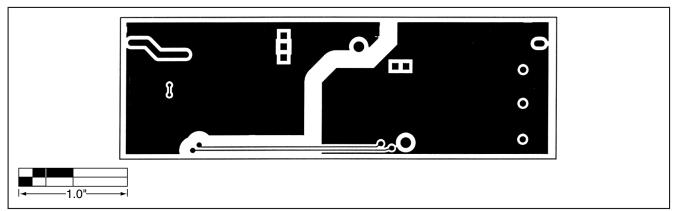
MAX5003-50W EV Kit PC Board Layout—Solder Side
